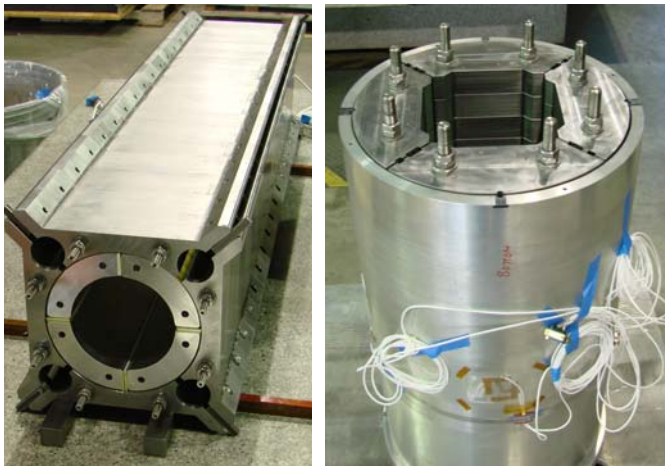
Section 2 dummy coil-pad sub-assembly (left) and yoke-shell sub-assembly (right) instrumented with strain gauges.
